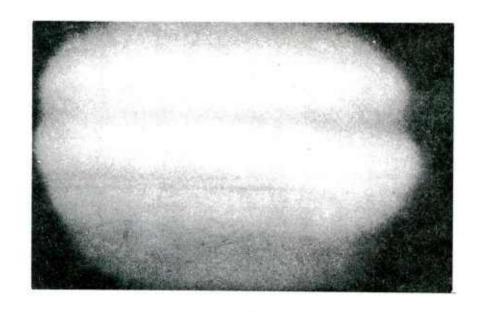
RADIOGRAPHY - LACK OF FUSION IN WELD A/PT5
